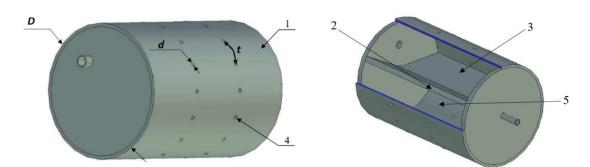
Drum pneumatic sowing device and parameters of the seeding drum. 1 - seeding drum; 2 - separator; 3 - the upper part of the drum; 4 - suction holes; 5 - the bottom of the drum.
